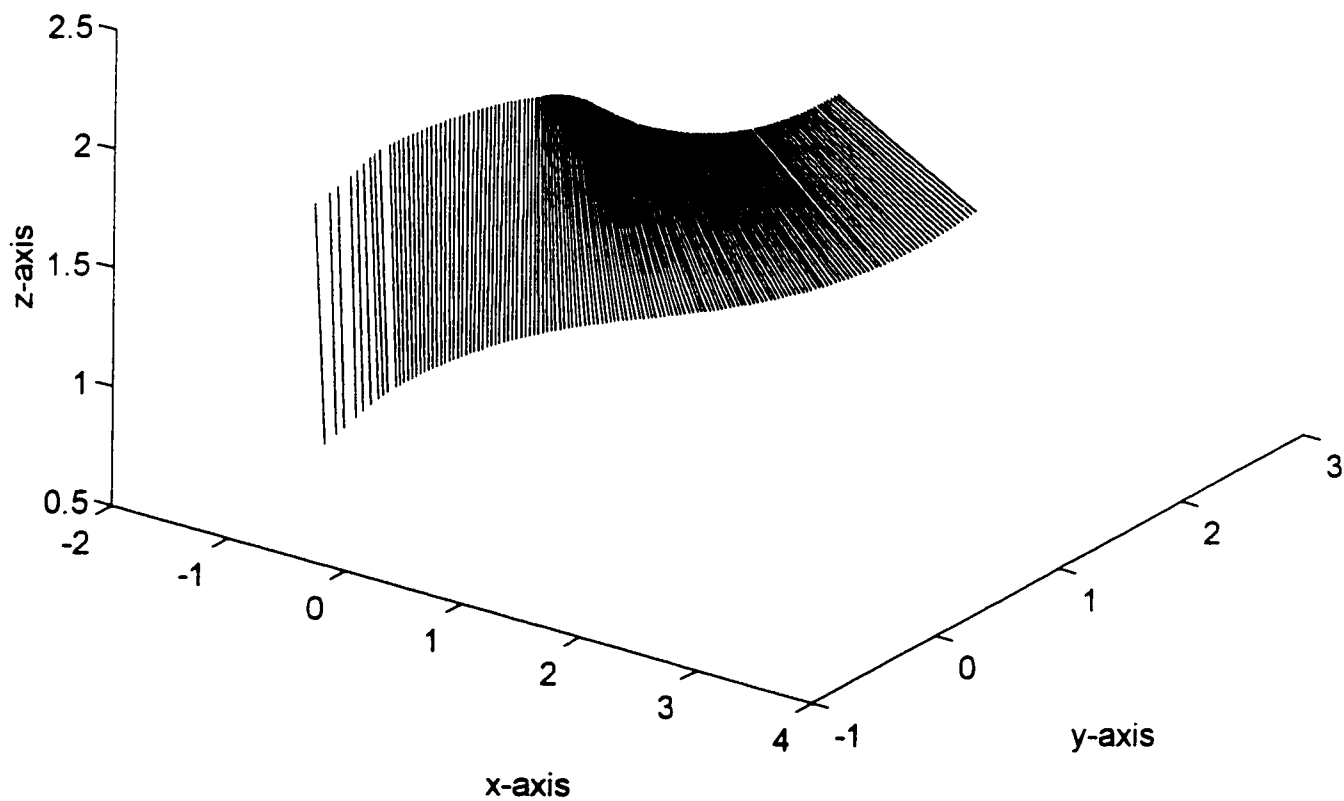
The Cutter Locations for Machining the Blade Surface
